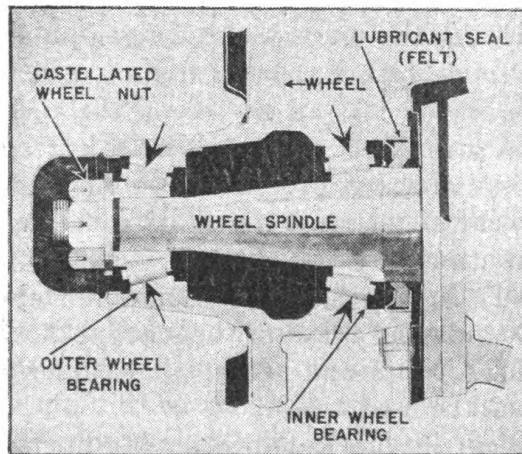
Wheel bearing lubrication (points of lubrication shown by heavy arrows).
